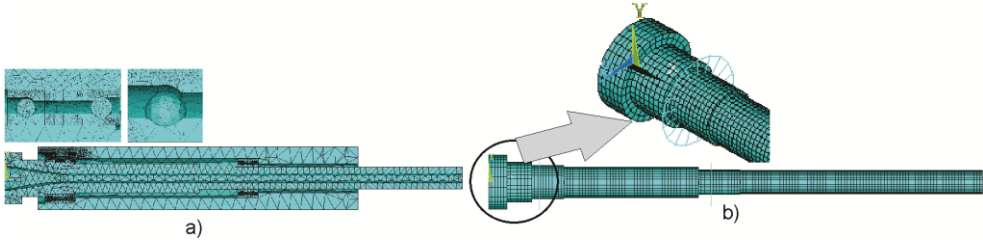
FE spindle model: (a) thermal, (b) elastic.
